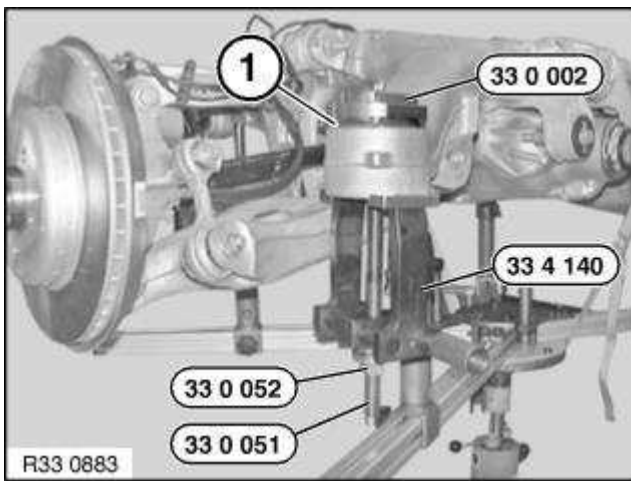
Draw In Rubber Mount As Far As It Will Go Into Rear Axle Support Bush
